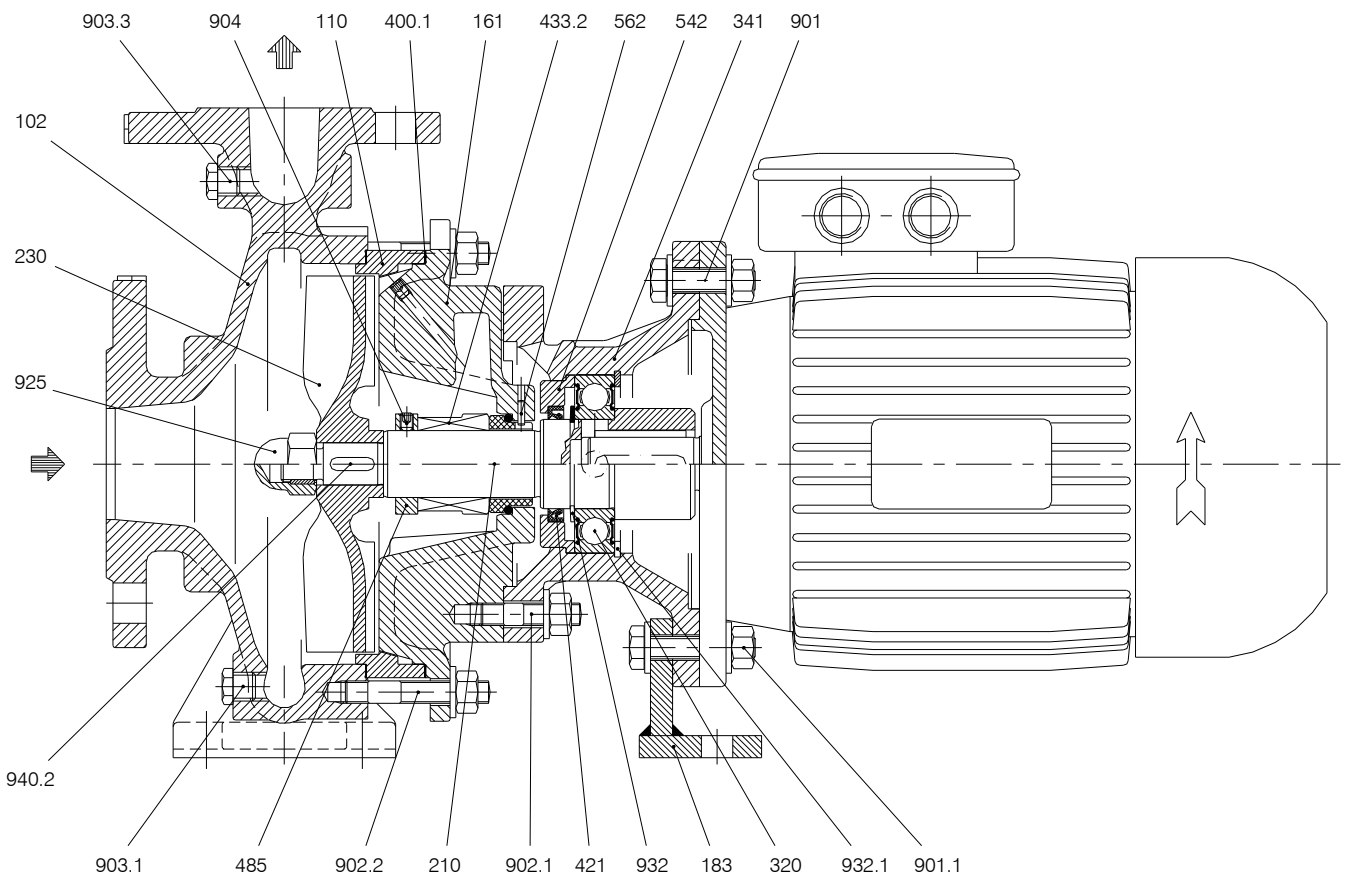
Pump series TCTM gr. 1 and 2 design /1-C = Single mechanical seal and motor frame 80 and 90
